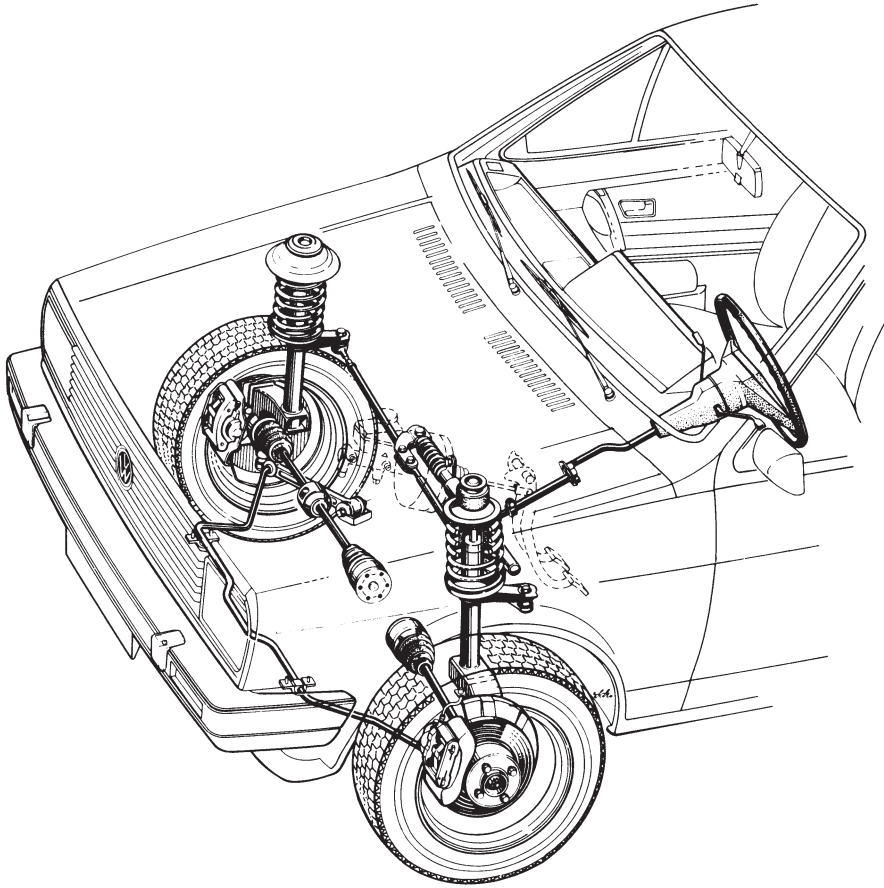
Damper strut front axle of a VW Polo (up to 1994) with 'steering gear', long tie rods and a 'sliding clutch' on the steering tube; the end of the tube is stuck onto the pinion gear and fixed with a clamp. The steering arms, which consist of two half shells and point backwards, are welded to the damper strut outer tube. An 'additional weight' (harmonic damper) sits on the longer right drive shaft to damp vibrations. The anti-roll bar carries the lower control arm. To give acceptable ground clearance, the back of it was designed to be higher than the fixing points on the control arms. The virtual pitch axis is therefore in front of the axle and the vehicle's front end is drawn downwards when the brakes are applied (Figs 3.142 and 3.143).
